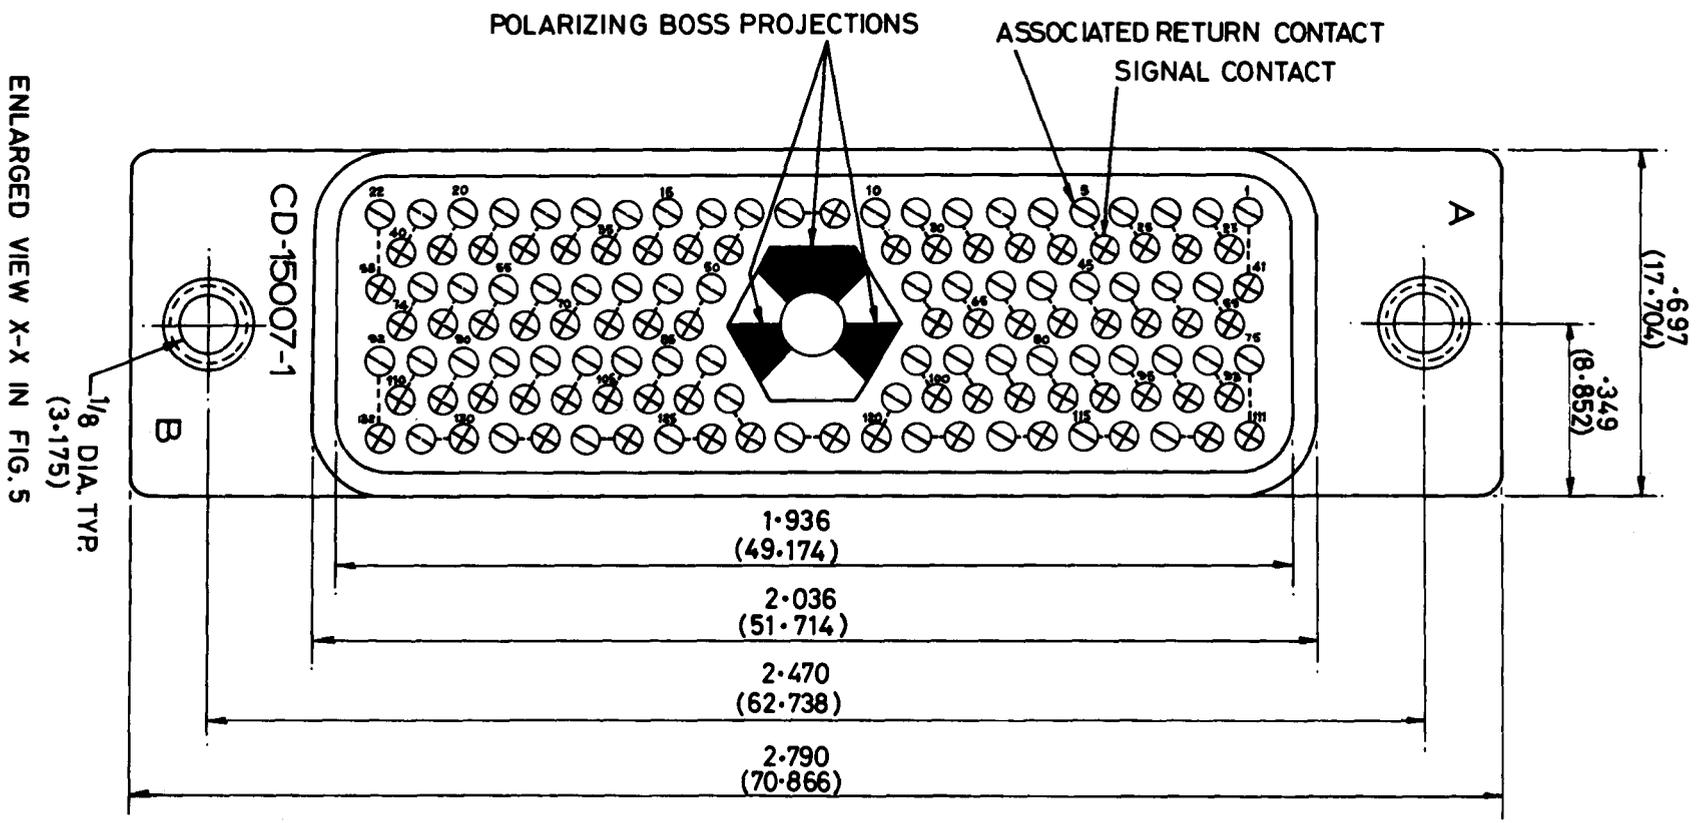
BRANCH HIGHWAY PORTS: CONTACT LAYOUT.
